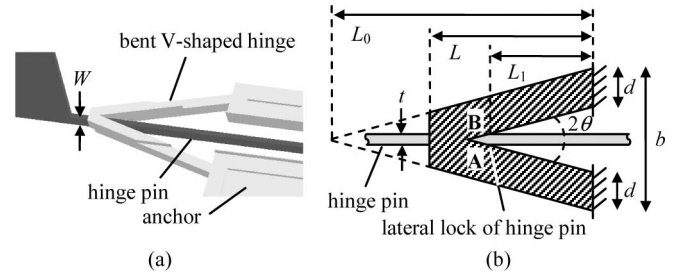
Play-less V-shaped hinge after assembly. (a) Schematic. (b) Top view.
